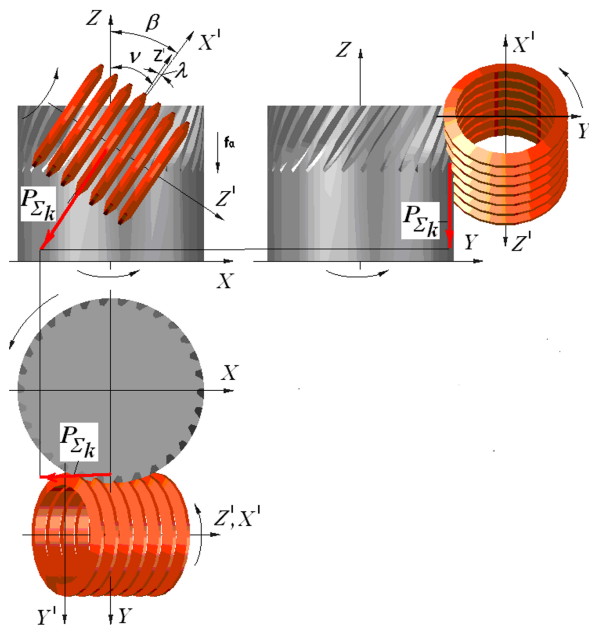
Hob cutter image with the set of cutting teeth splines in hobbing process
